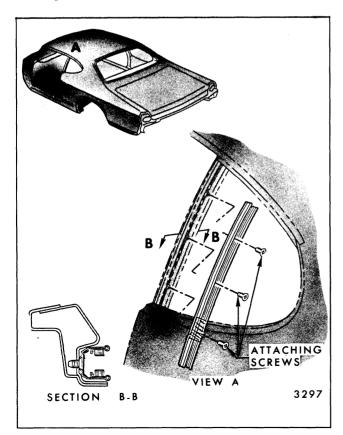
Rear Quarter Window Front Glass Run Channel Typical of All Closed Styles
